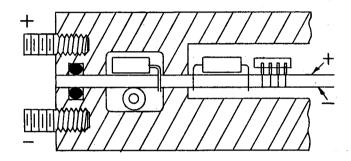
A converter is assembled and tested at low power on a heavily clad printed circuit board. A pair of castings then clamps the board, making thermal and power contact, and becomes combined power bus and heat sinking.
